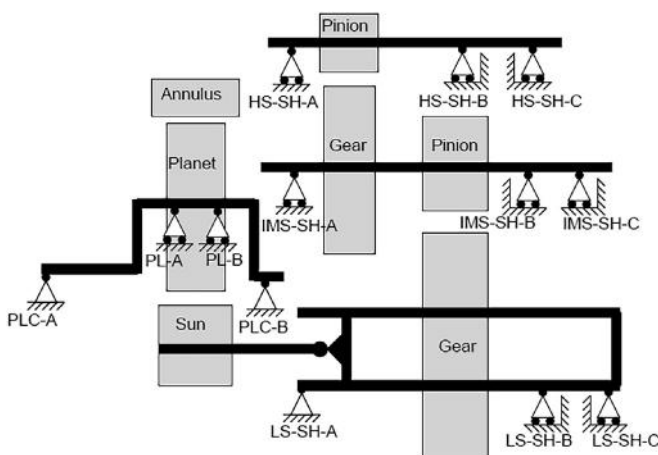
Locations and nomenclature of the bearings in the test gearbox.
